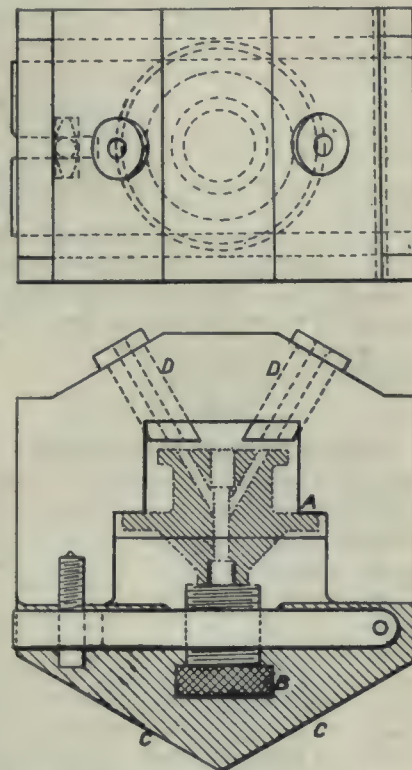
DRILL JIG FOR TWO SMALL HOLES, PIECE "B," FIG. 8.
